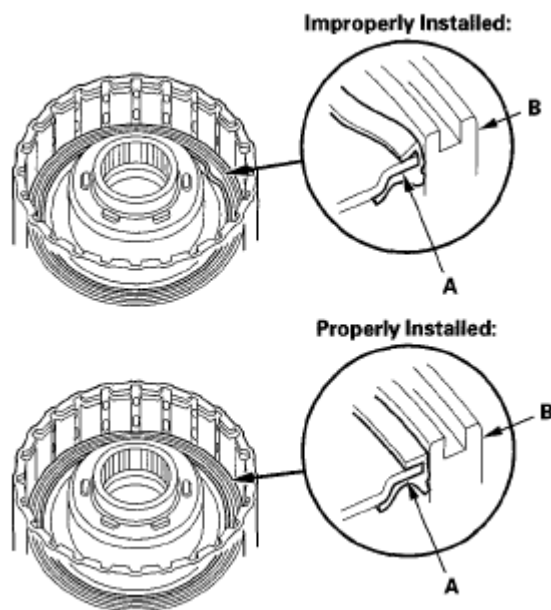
Identifying Spring Retainer Proper And Improper Installation Position
